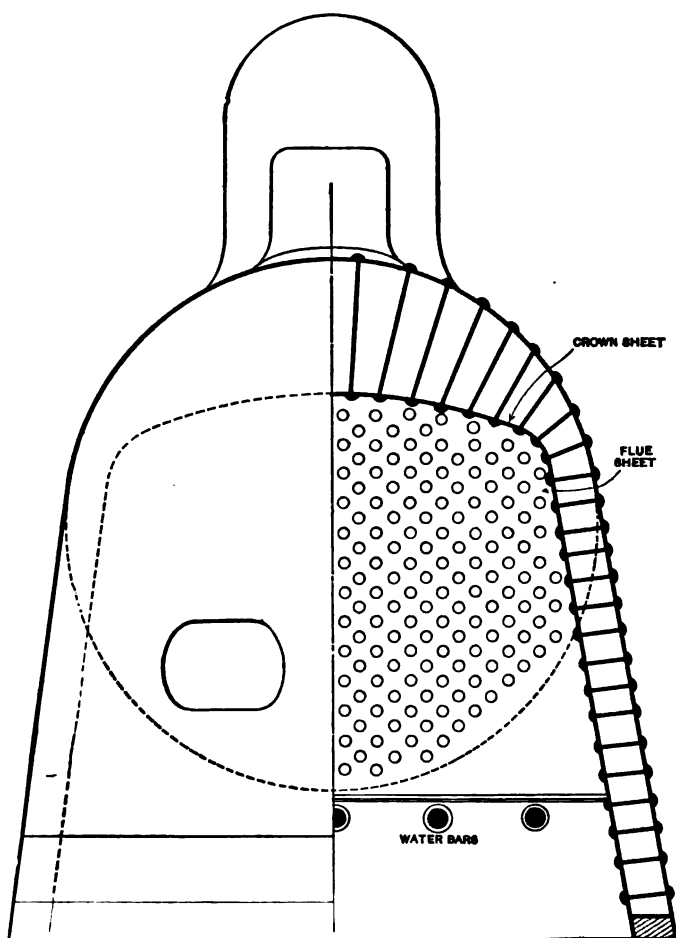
BACK END OF PRAIRIE-TYPE BOILER ; TWO FIRE-DOORS.
